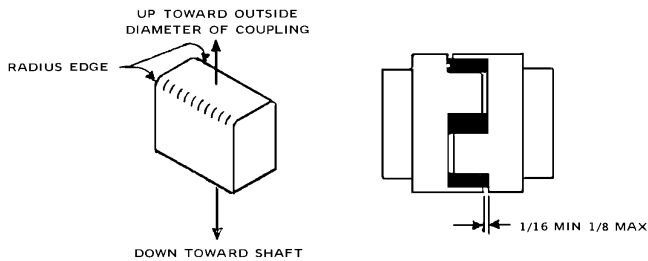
INSTALLATION OF COUPLING – STYLE “A”
